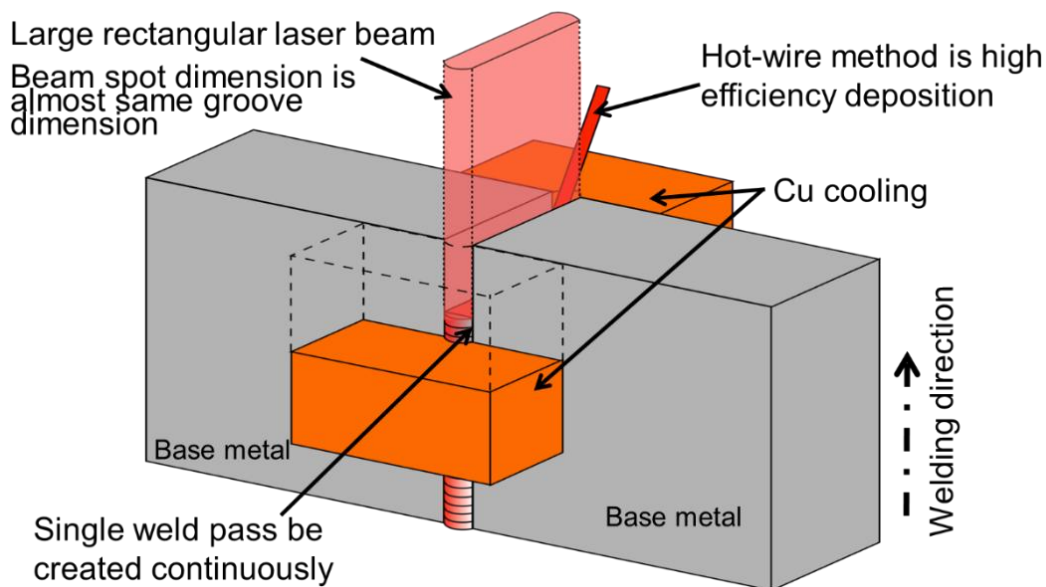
Schematic illustration of novel welding process.
